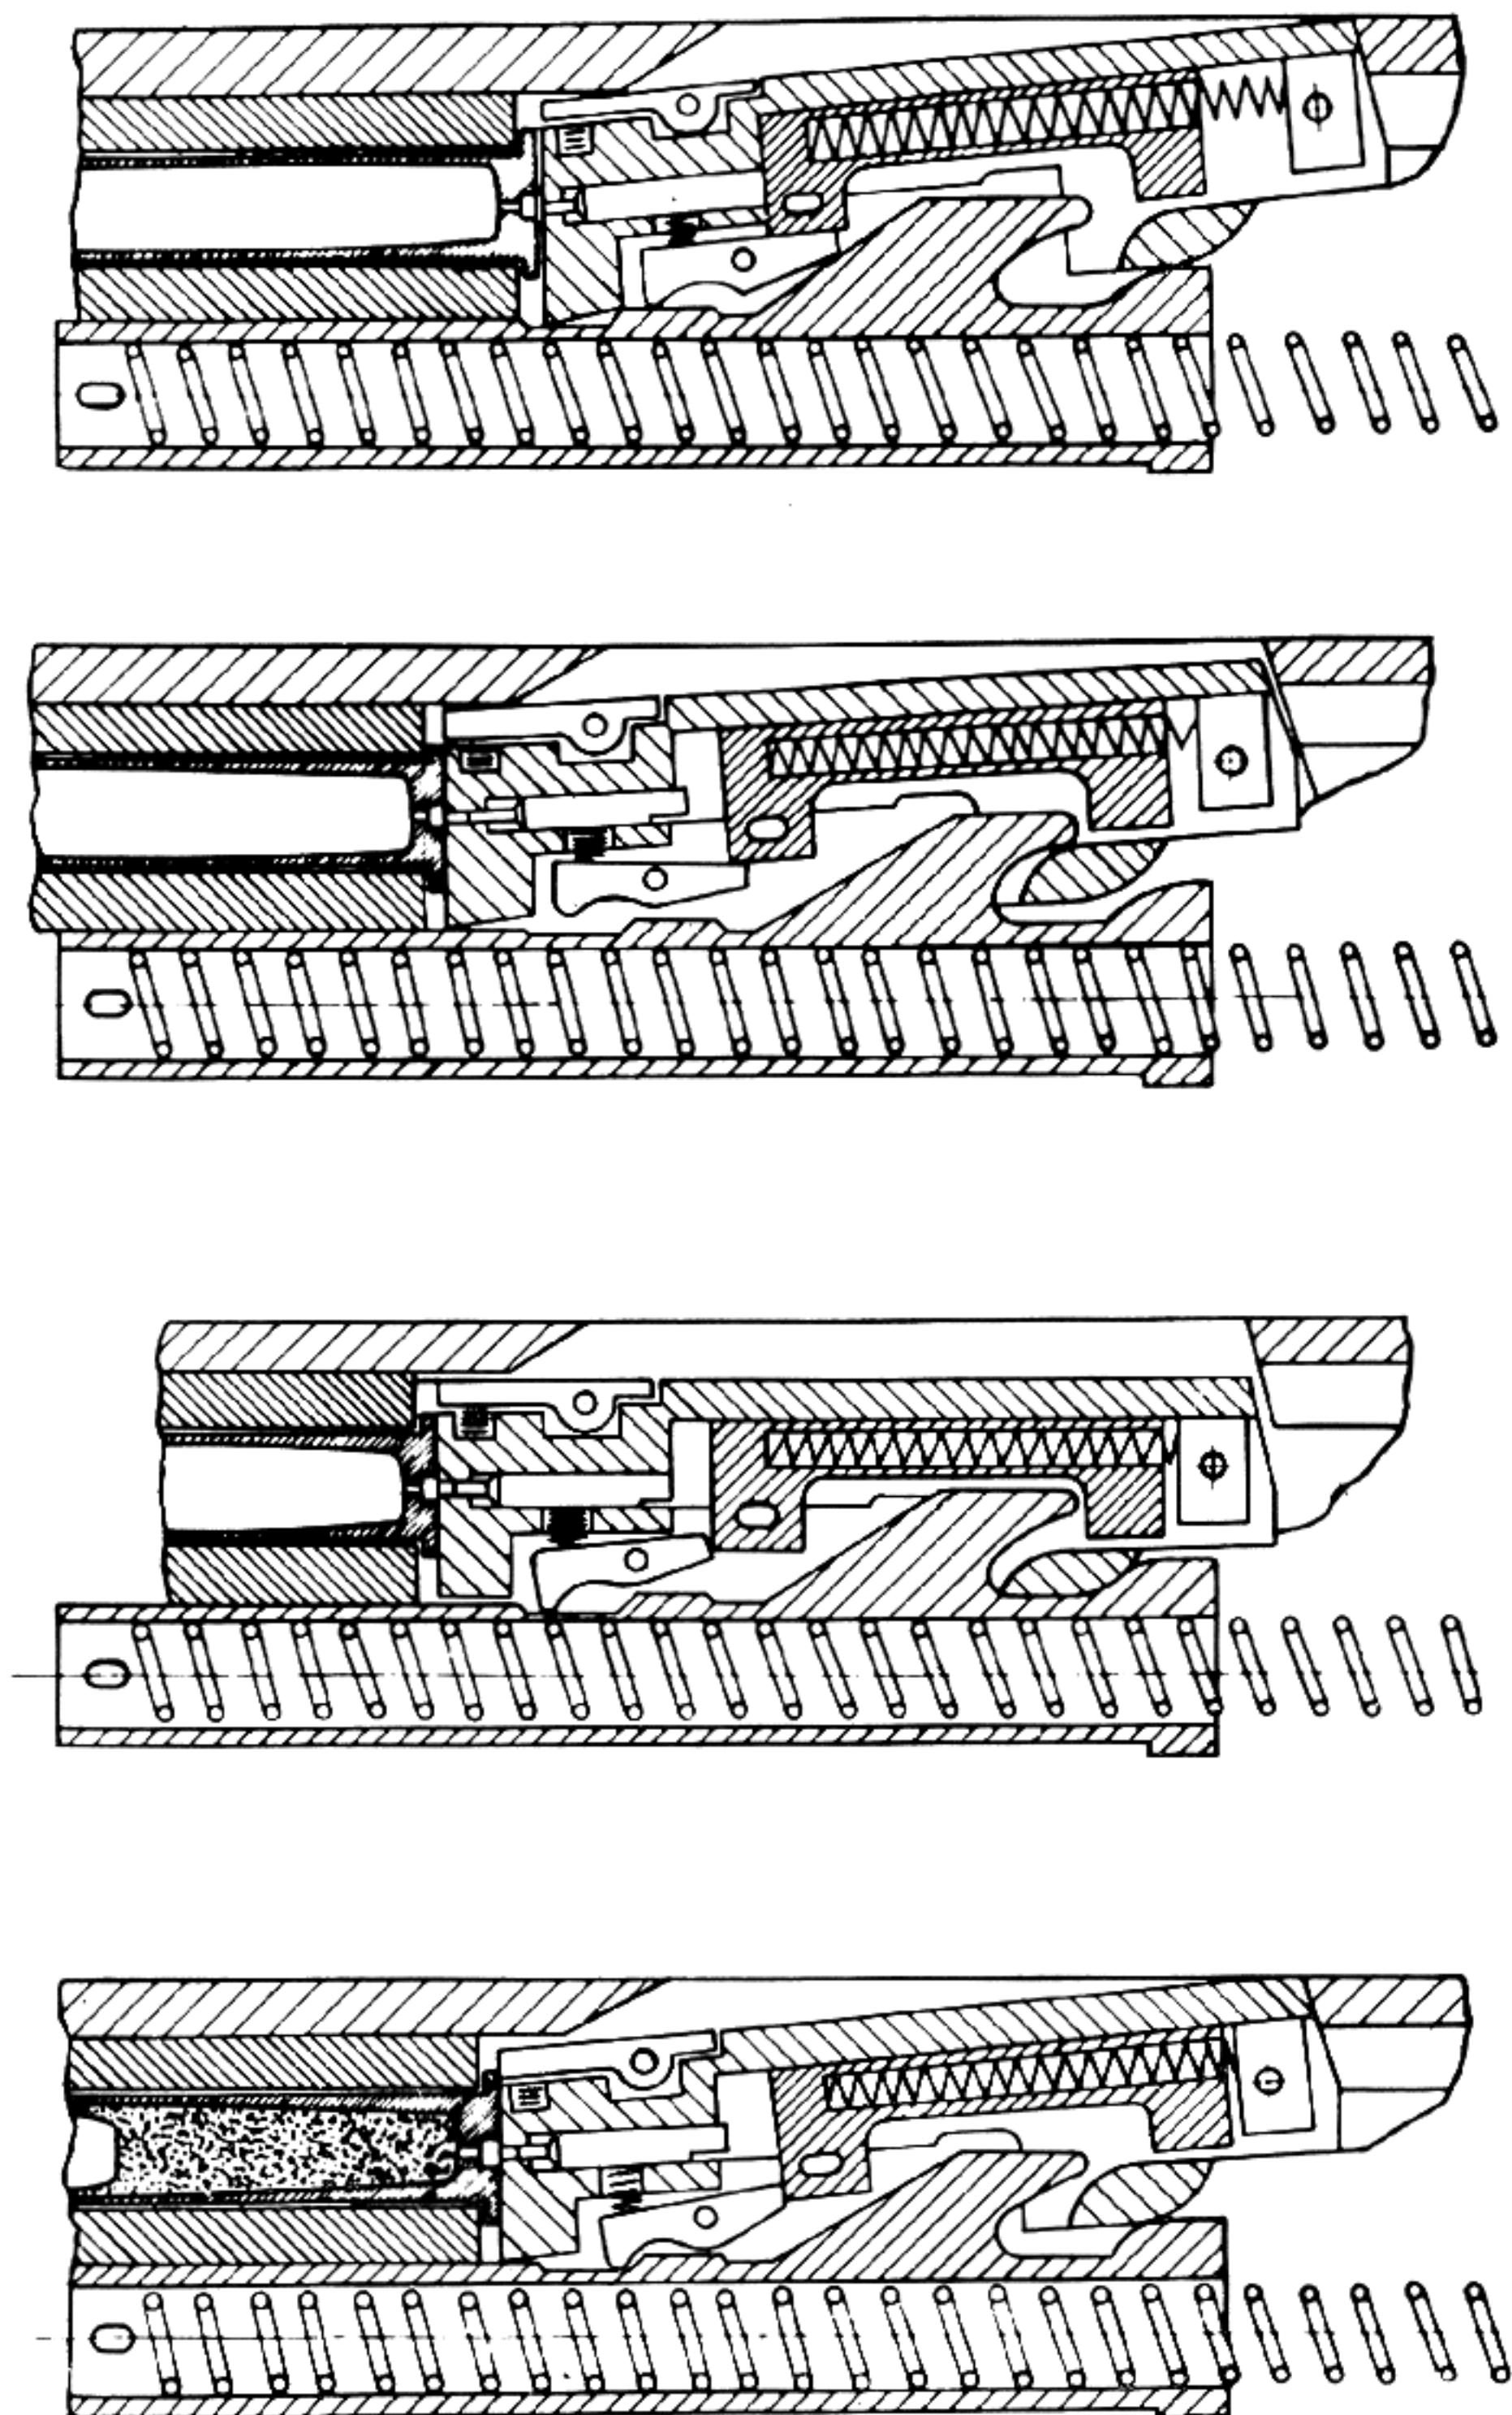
Locking action of the Shvak Cannon. Top to bottom: Ignition; commence unlocking; unlocked; reloaded, locked and cocked.
